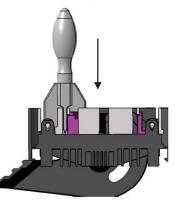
38-way connector, operating tool in final position Abb. 20 Kabelbaumstecker 38 polig; Betätigungswerkzeug in der Endposition
